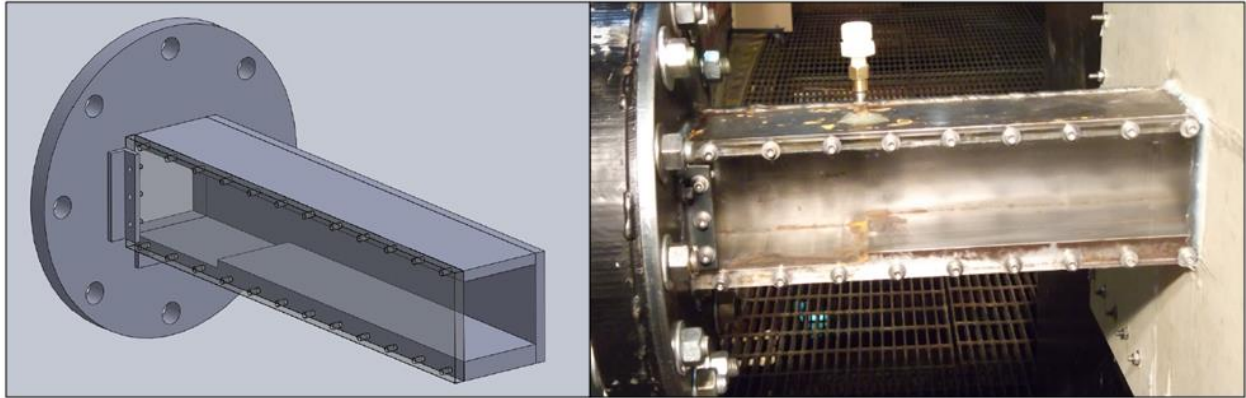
Isometric View of Final Rendering of Cavitation Tunnel and Photo of Cavitation Tunnel In-situ
